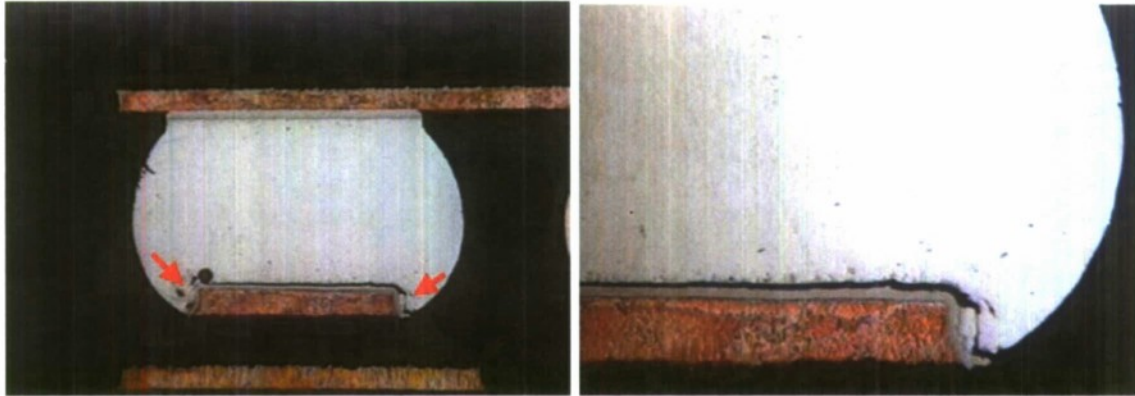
Solder joint fracture near the board-side IMC layer
